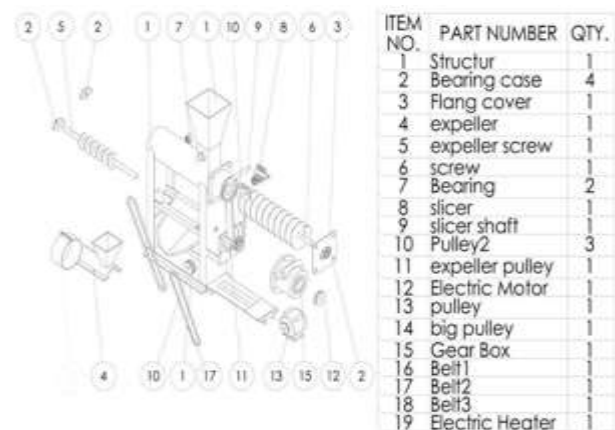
View of Coconut Oil Processing Machine with Labeled Parts
